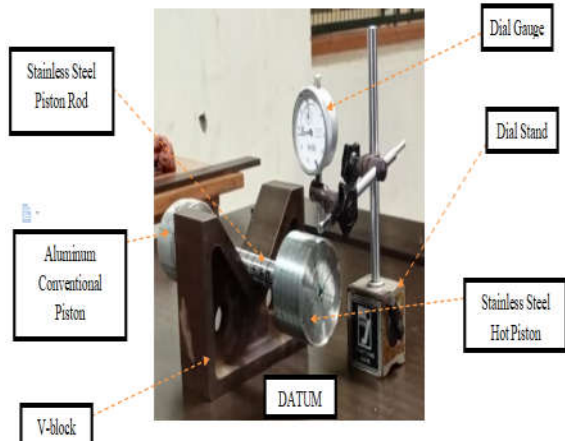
Piston assembly inspection setup used in metrology lab of Department of Manufacturing Engineering Annamalai University
